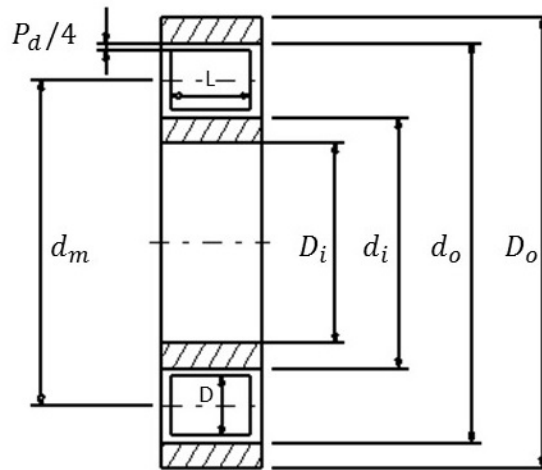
Cylindrical roller bearing geometry, adapted from [3]
